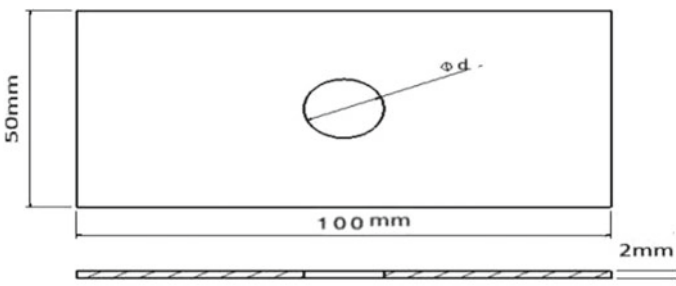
Dimensions of a rectangular plate with circular cut-out
